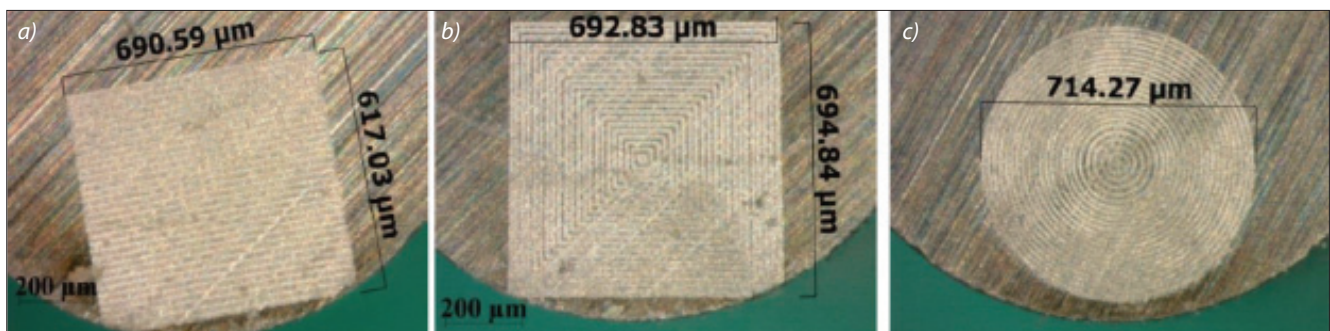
Examples of micro-structures fabricated on CBN cutting inserts using FIB process: view of texture on the corner with a) linear, b) square and c) circular grooves [13]
